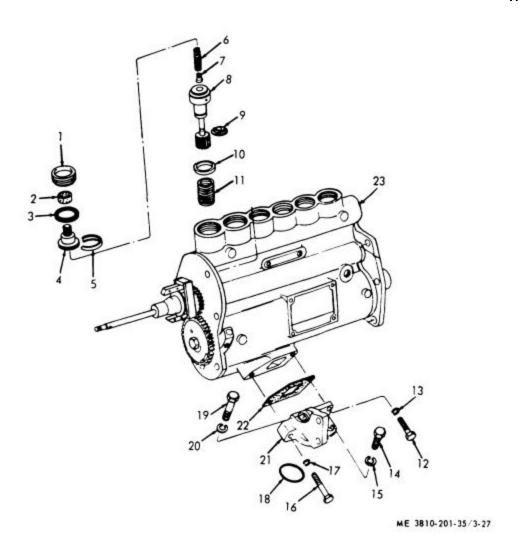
Fuel injection pumps, removal, disassembly, reassembly, and installation.
